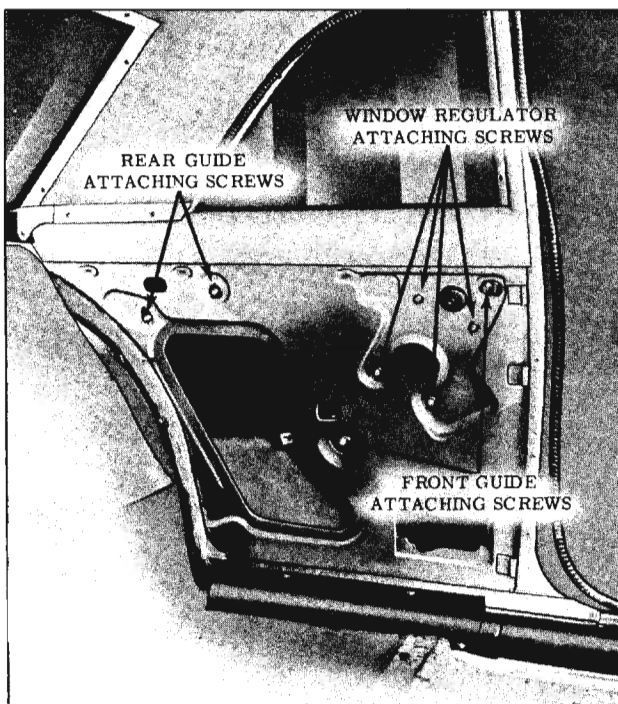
Rear Quarter Hardware (17 &amp; 27 Styles)
